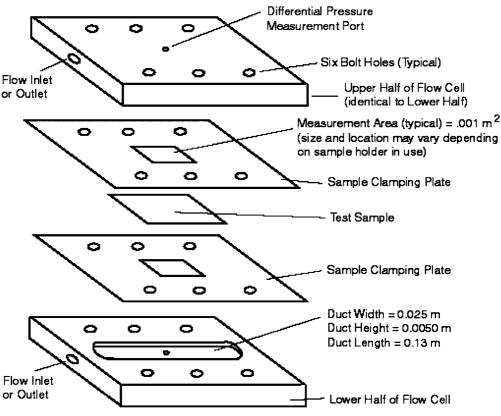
Typical Dimensions of the Specimen Holder for the DMPC
